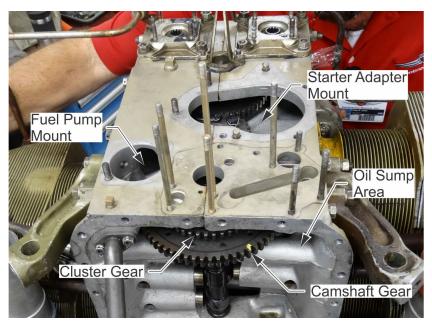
Camshaft Gear Access Points, Sandcast Crankcase
